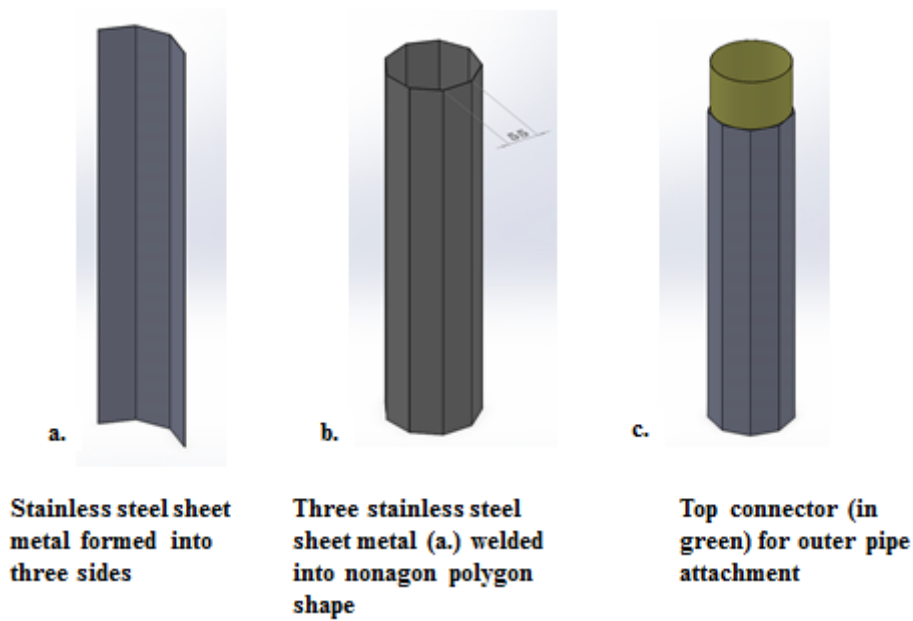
Stainless steel sheet metal forming for nonagon heat exchanger fabrication
